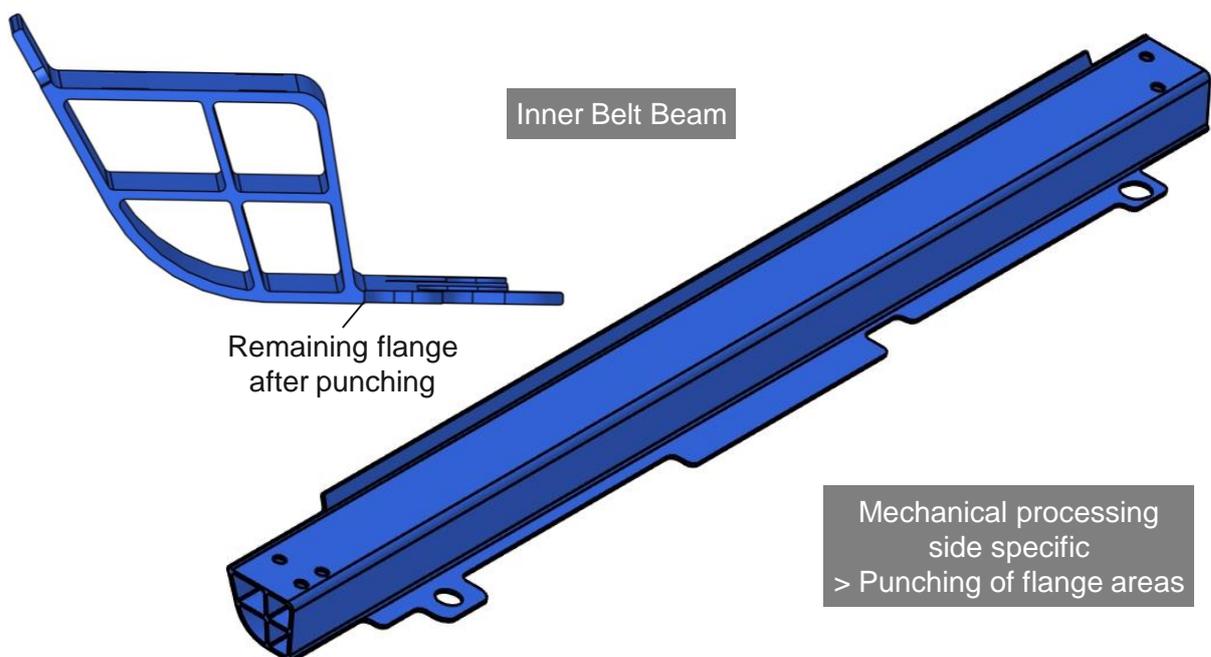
Inner Belt Beam geometry for left door (driver's door) - V1.6
